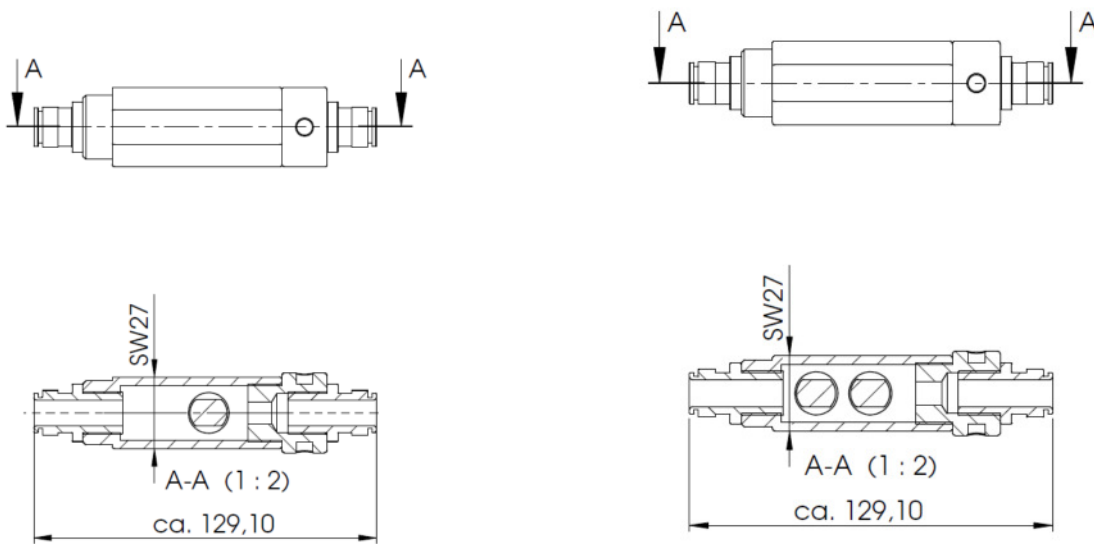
Sectional view KKTSiO-XX&KKTSiS-XX    Picture 6: Sectional view KTSiOx-XX&KTSiSx-XX
